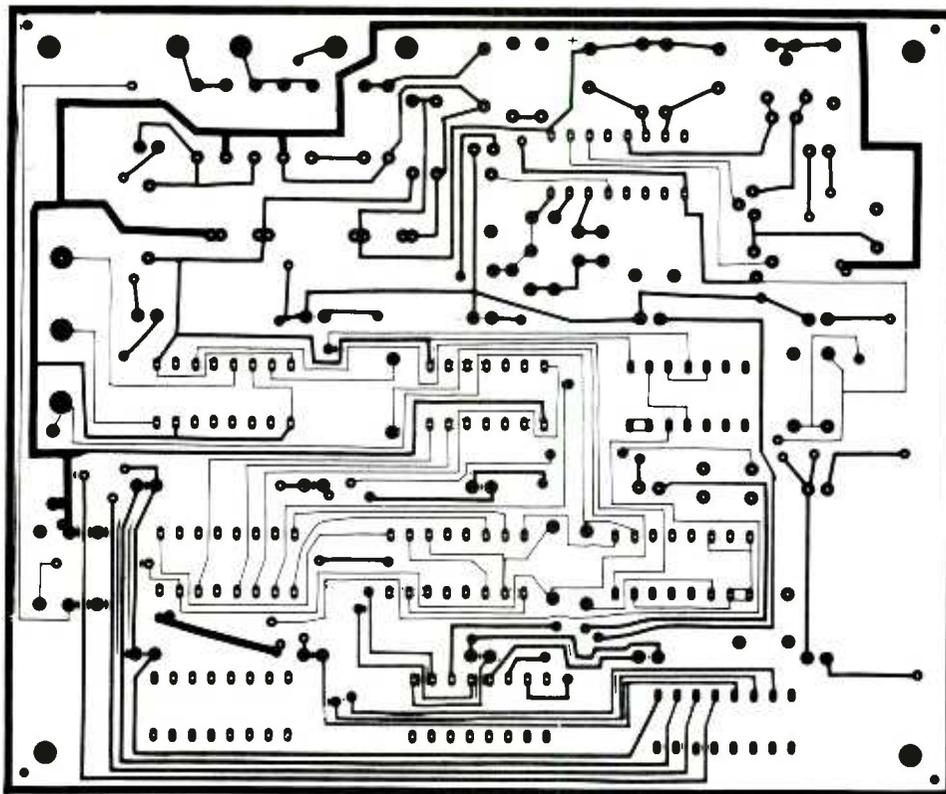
X-RAY VIEW OF THE TWO ETCHED SURFACES of the PC board as they actually overlay each other. Circuit tracing is a bit easier using this illustration.
